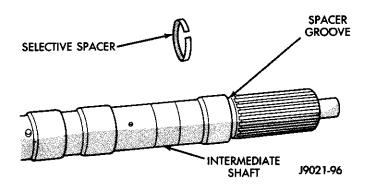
Intermediate Shaft Selective Spacer Location CAUTION: Do not tilt the unit during installation. Tilting the unit could cause the planetary gear and and overrunning clutch splines to rotate out of alignment. If this happens, it will be necessary to remove the overdrive unit and realign the components with tool C-6227-2.
